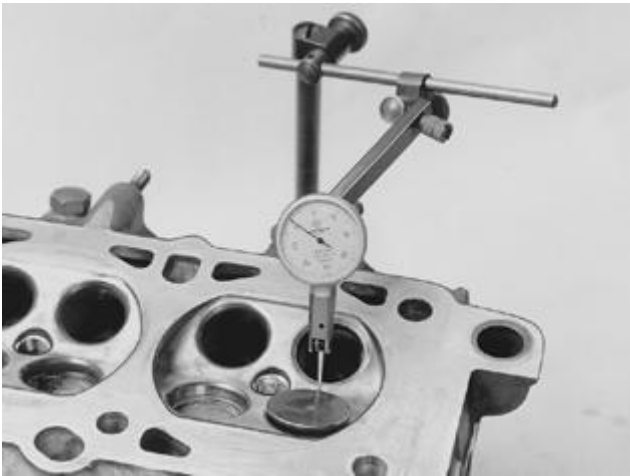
Identifying Measurement Of Wear In Valve Guides Using A Dial Indicator And Magnetic Holder
